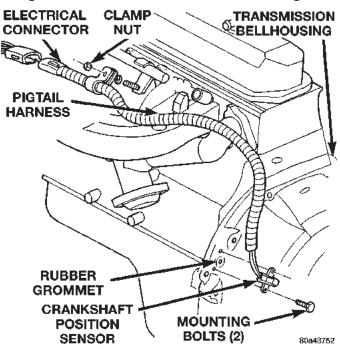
Crankshaft Position Sensor —4.0L Engine
